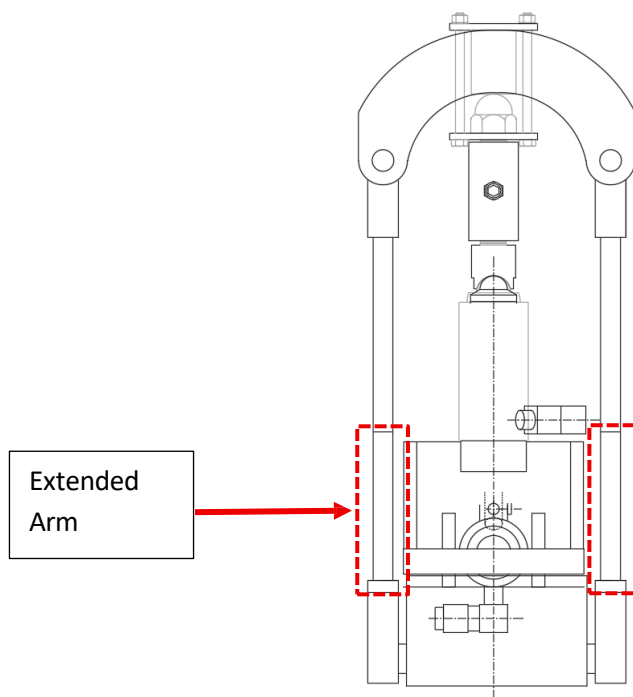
An elevation view of the engineered drawings of the extended set up
